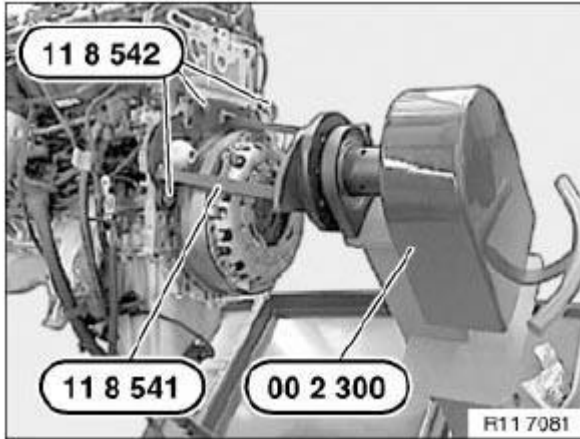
Mounting Engine Or Engine Block With Special Tool 11 8 542 To 11 8 541
